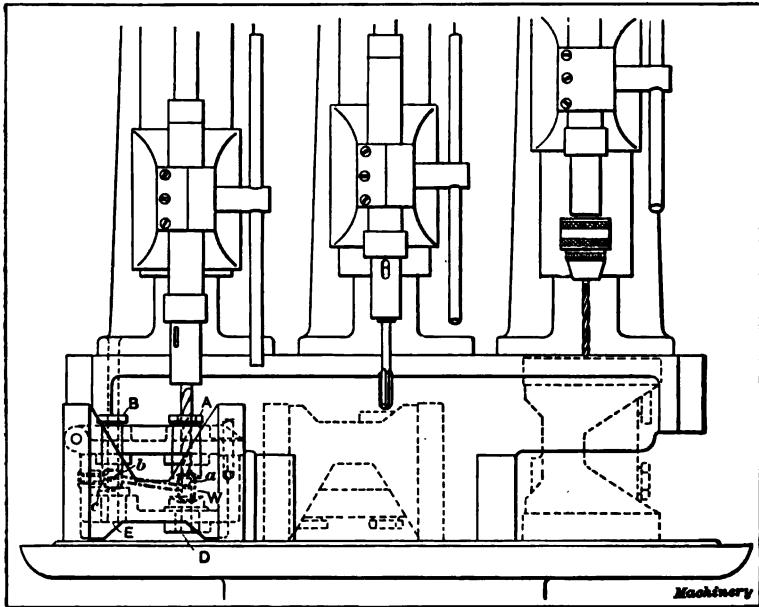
Method of Using Multiple-spindle Machine for Successive Operations
